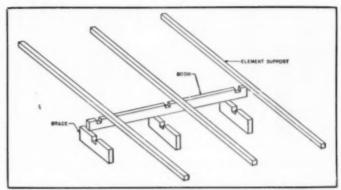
"Exploded" view of the antenna frame showing how parts are assembled.
